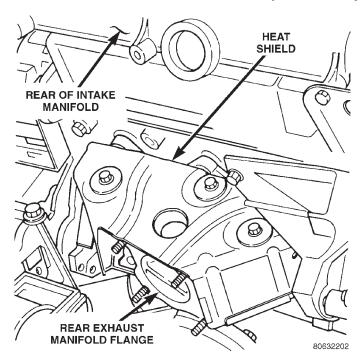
Rear Exhaust Manifold—2.5L Engine
